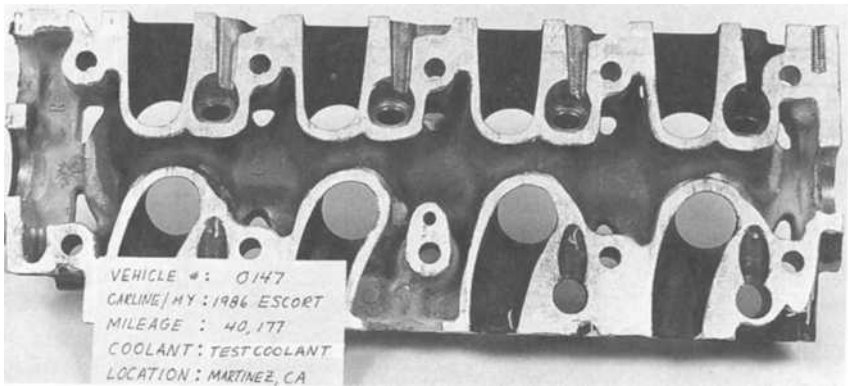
Cylinder head cooling jacket of Vehicle 0147.
